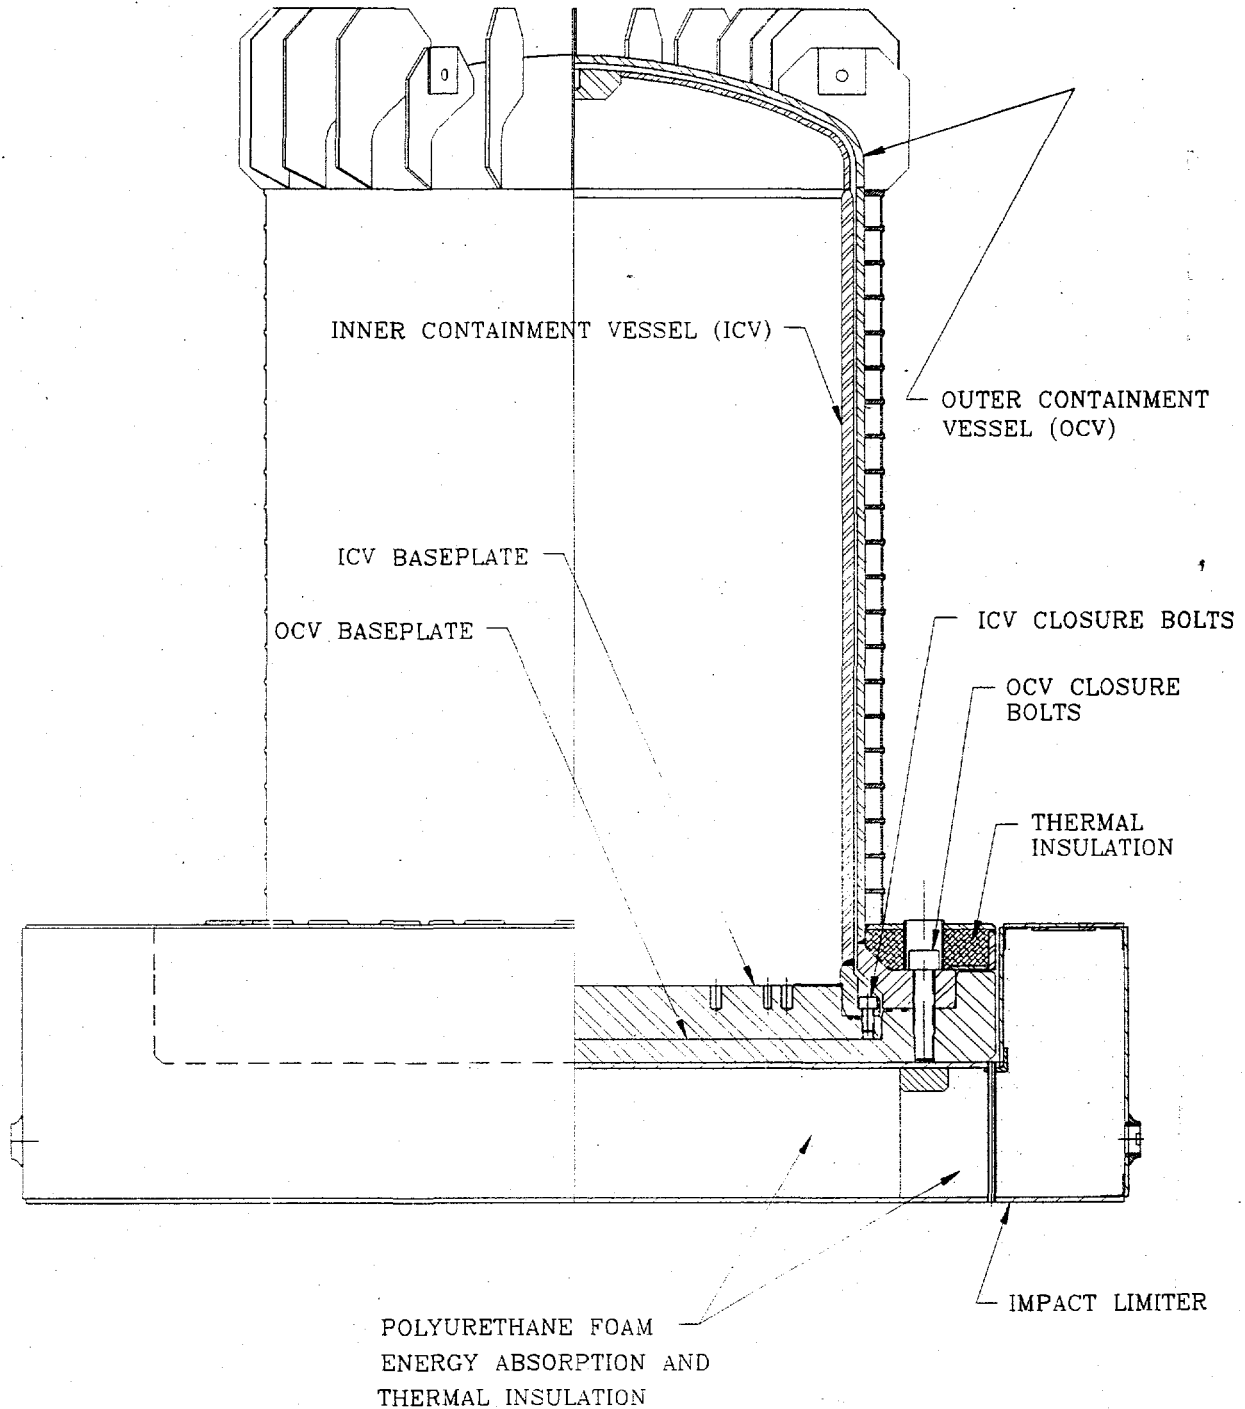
Licensed Hardware Assembly Partial Sectional View.
